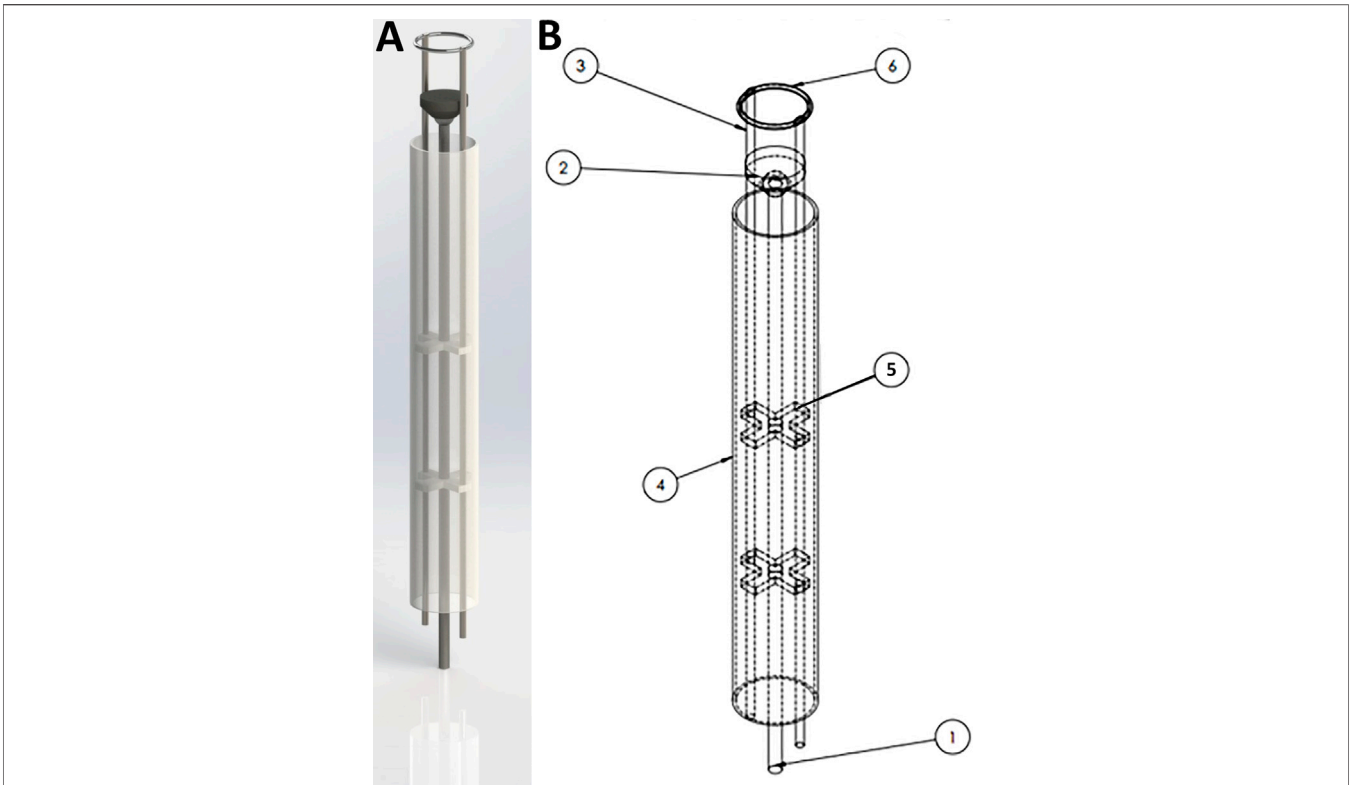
| SolidWorks design for the HeartStamp device prototype. 3D rendering of the HeartStamp instrument (A) and technical details with labelled parts (B). Item labels: 1) Central Rod (controls the puck); 2) Puck (pushes patch off the ring and onto the heart); 3) Paired Ring Rod (controls the ring angle); 4) Tube (provides protection for components-tube length is modifiable with a long tube shown here whereas a short tube version was used at surgery and shown in Figure 4); 5) Paired X-shaped Support (supports the rods); 6) Metal ring (the heart patch is rested on this). The resulting prototype generated from these computer-aided designs is shown in Figure 4 and the raw data are available in the Supplementary Materials.
